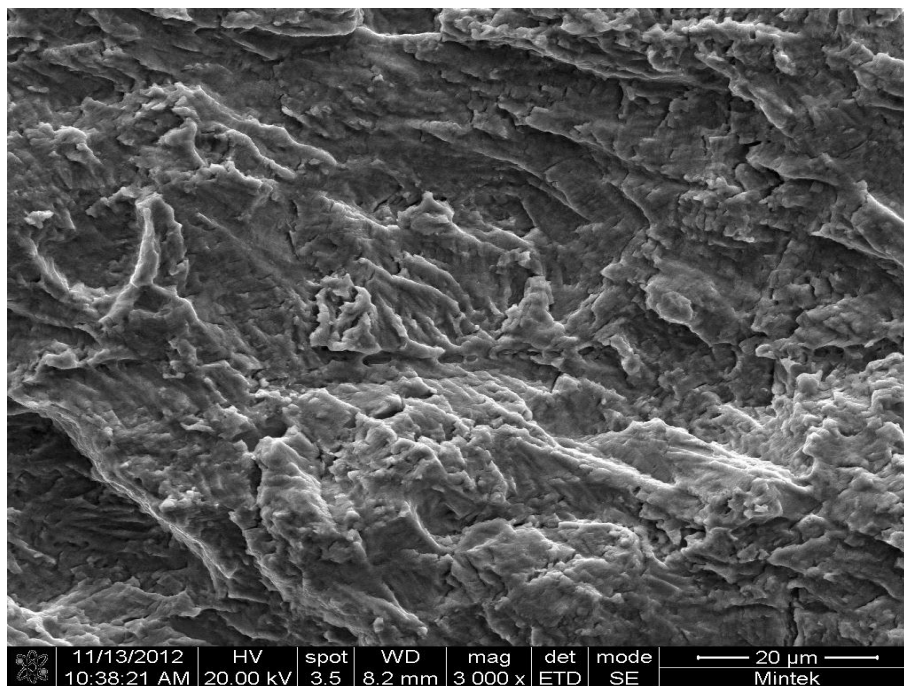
Crack initiation zone of AISI 316L sample carburised at 650°C showing brittle (tearing) with dispersed secondary cracking within the fractured surface.
